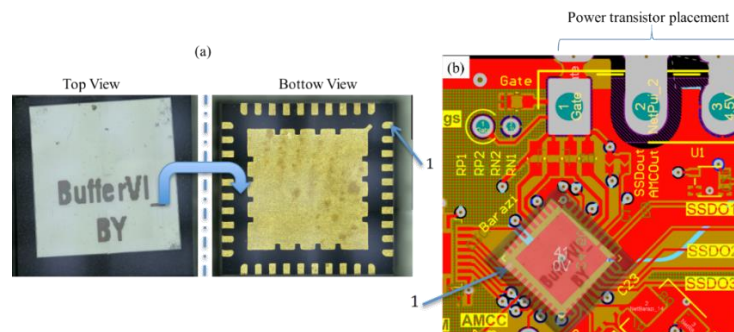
(a). AGD in package (b). placement of the AGD on the PCB
